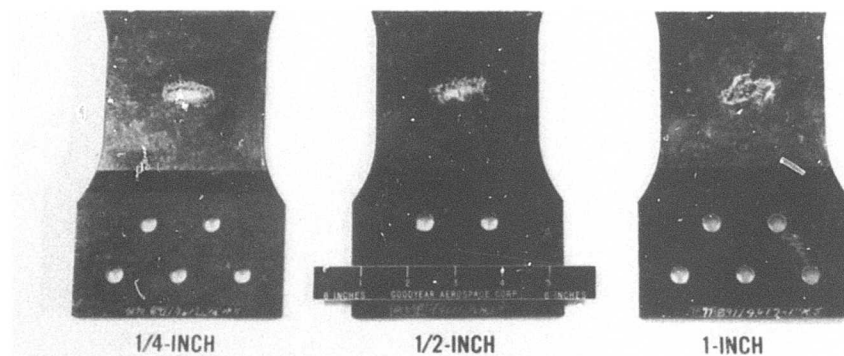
Typical Front Surface Ballistic Damage - Specimens With 836 Fiber Finish.
